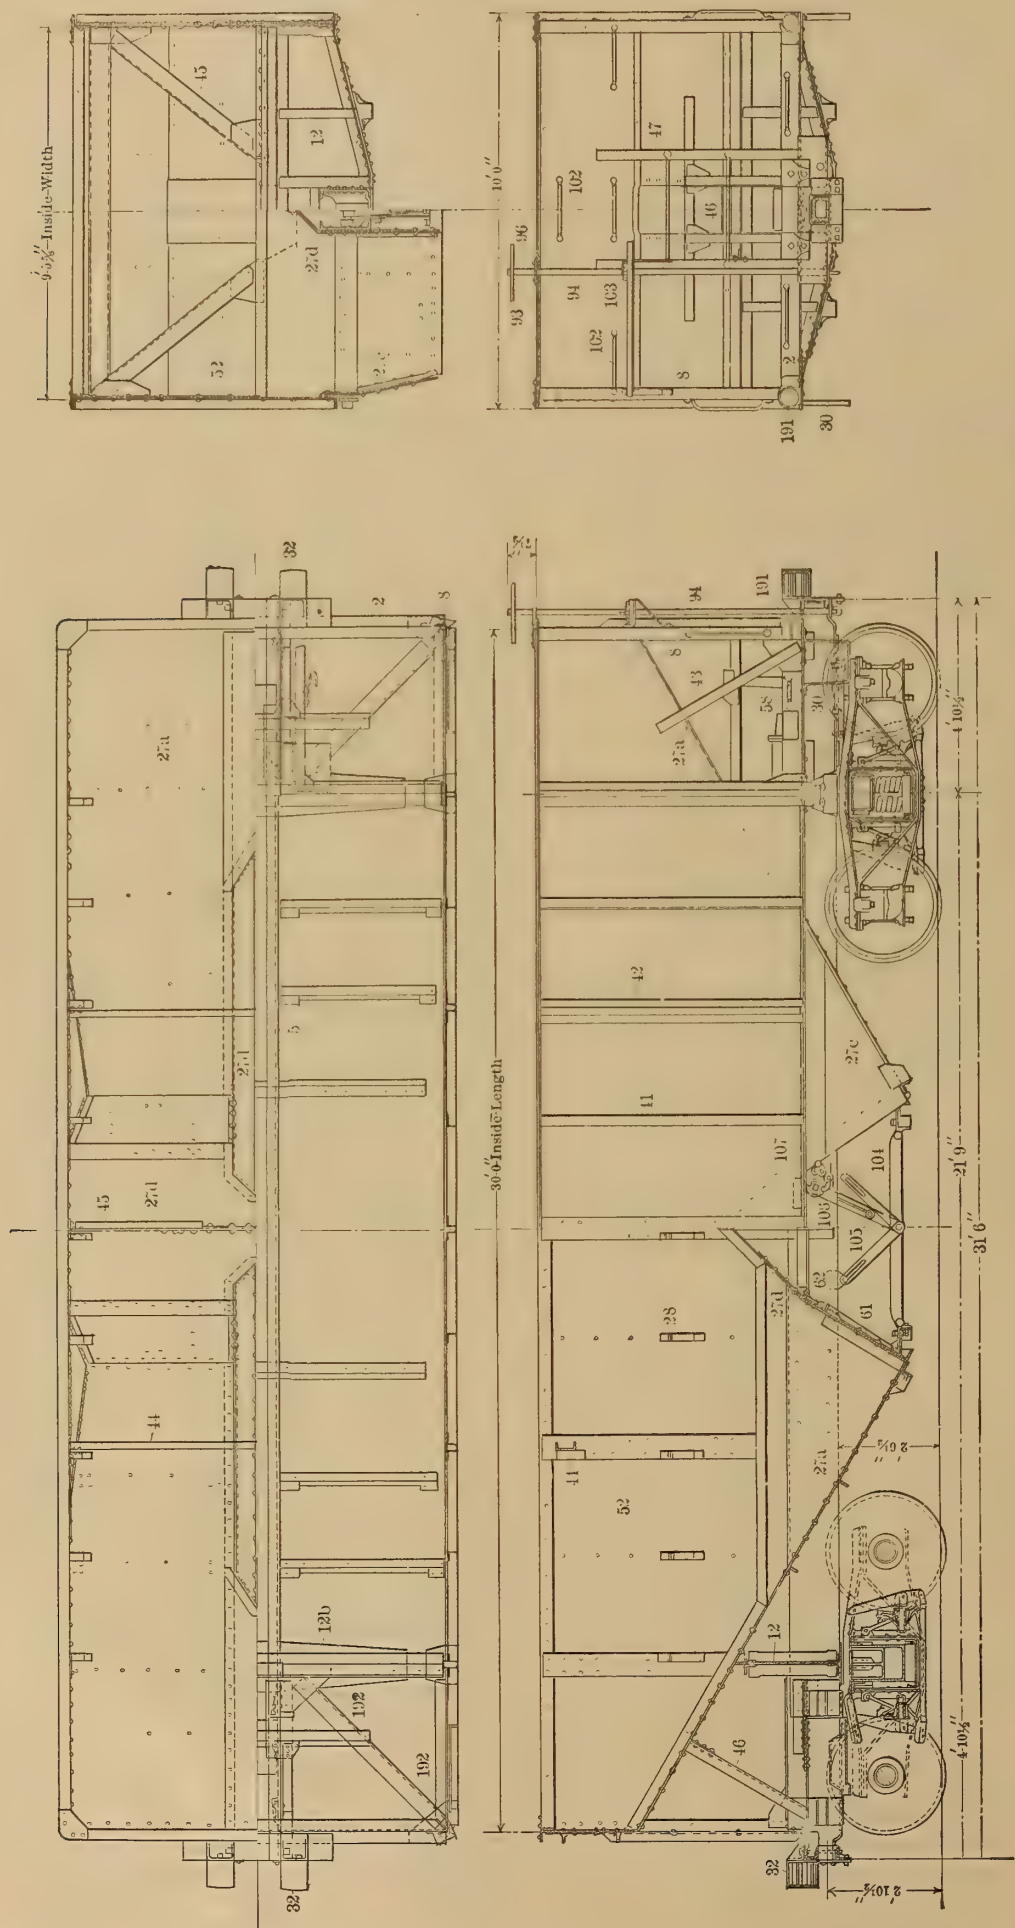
PLAN, ELEVATIONS AND SECTIONS OF 34-FT. STERLINGWORTH HOPPER BOTTOM GONDOLA CAR. STRUCTURAL STEEL. CAPACITY, 80,000 LBS.
